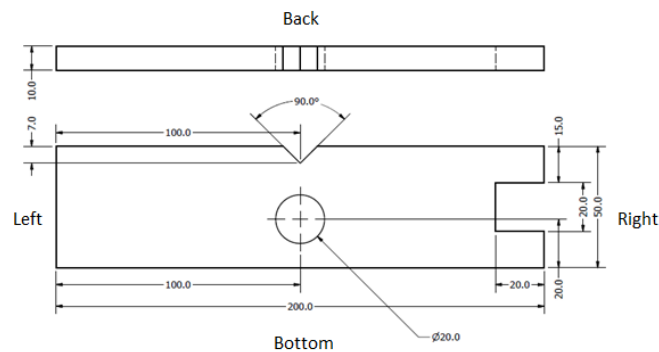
A drawing of the widget blank with basic dimensions. Labels have been added to the sides of the blank for easy reference.
